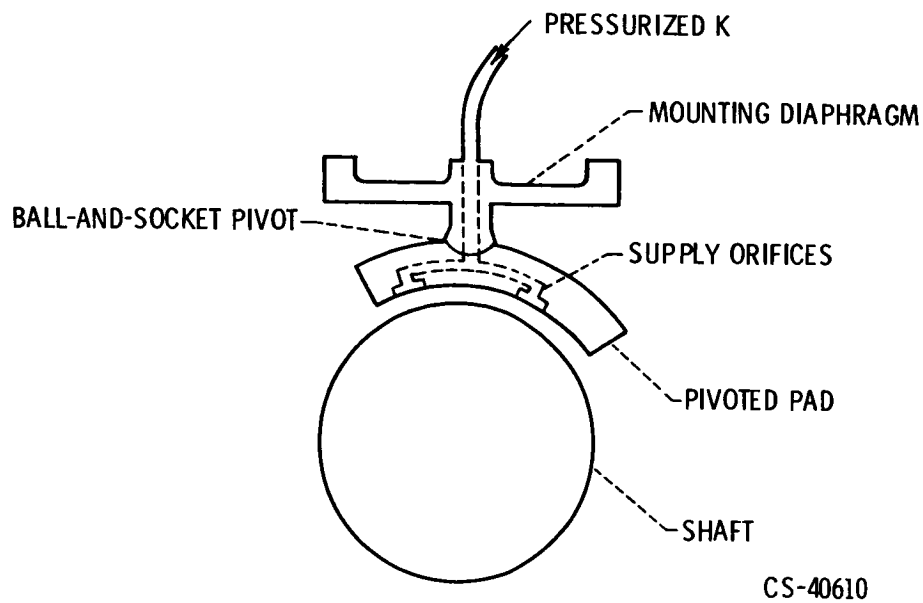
Mounting arrangement for pivoted-pad bearing.
